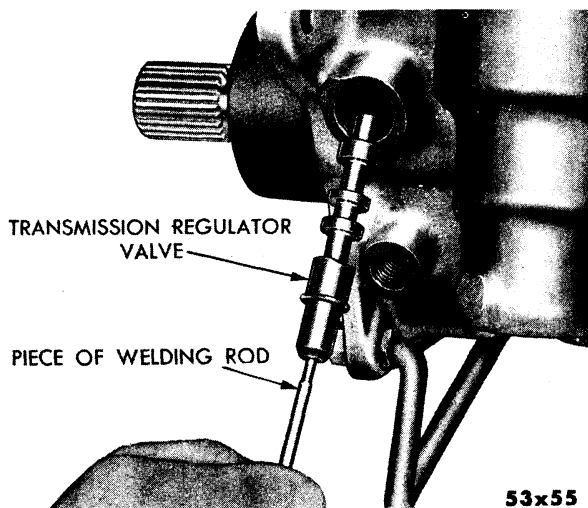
Typical View—Showing Method of Removing Regulator Valve
